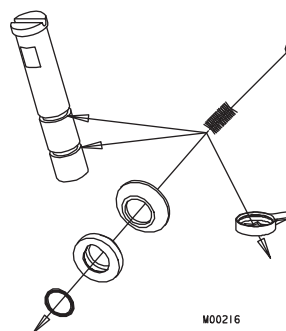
Clean O-ring grooves, seal and nozzle with brush.
